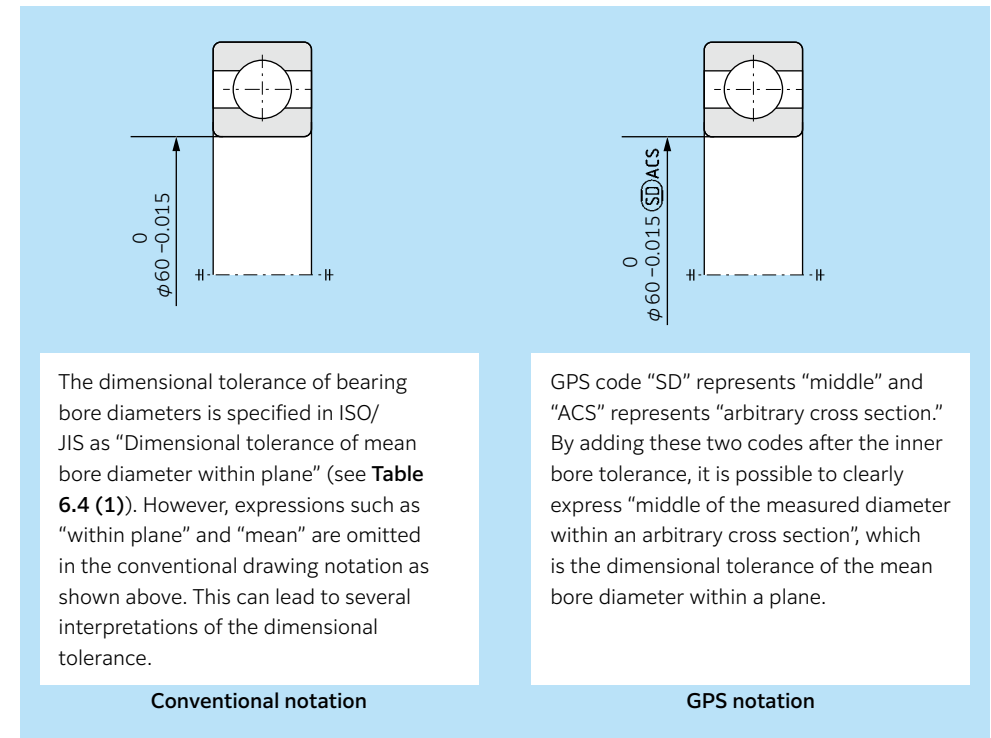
Notation example of bearing bore diameter tolerance
